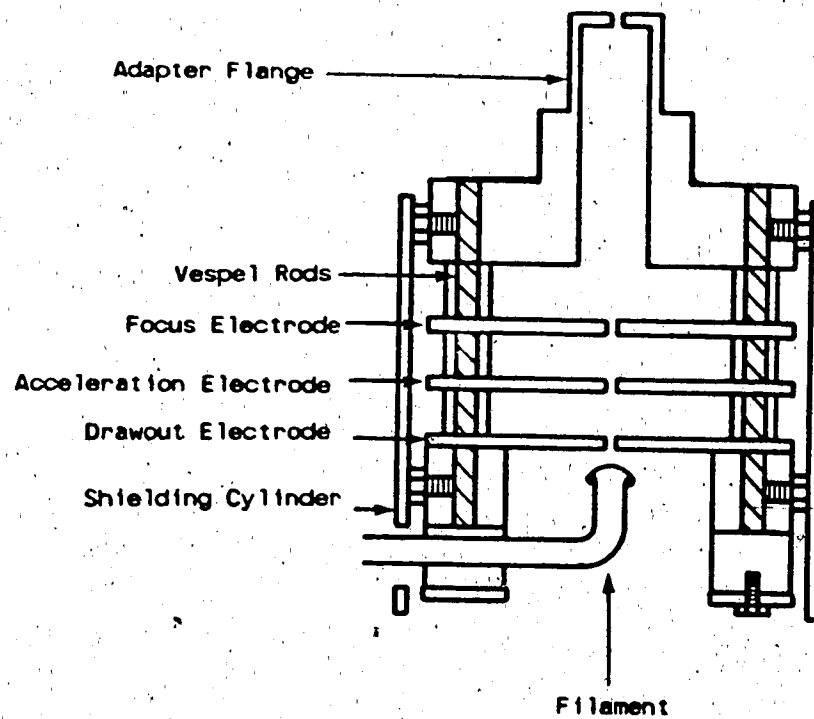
Cross Sectional View of the Electron Gun Assembly.
